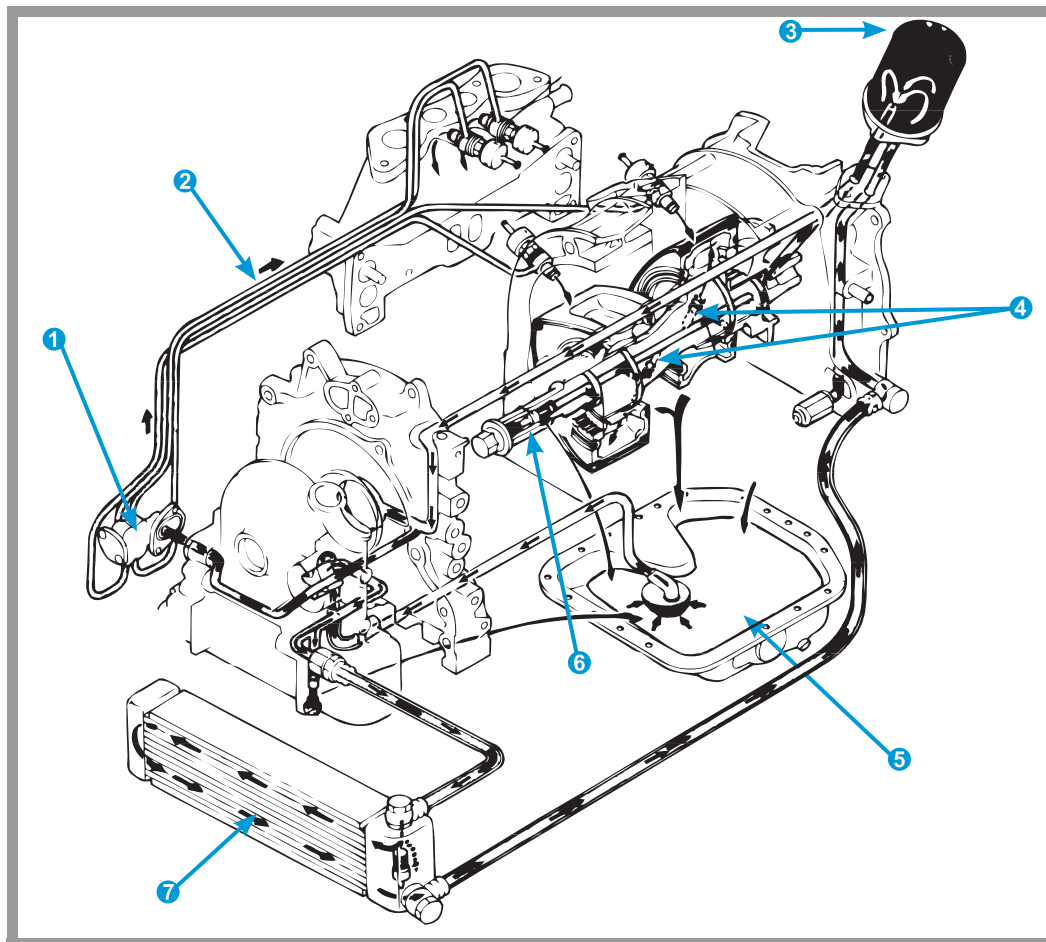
Rotary engines use oil for lubrication, cooling, and to improve sealing in the engine's working chambers.
